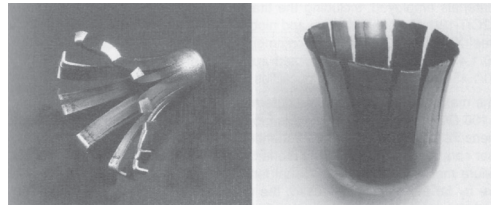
Examples of “delayed cracking” in austenitic stainless steel cups produced in conditions of severe drawing. On the left: flat bottomed cylindrical cup with flange. On the right: flat bottomed cylindrical cup
